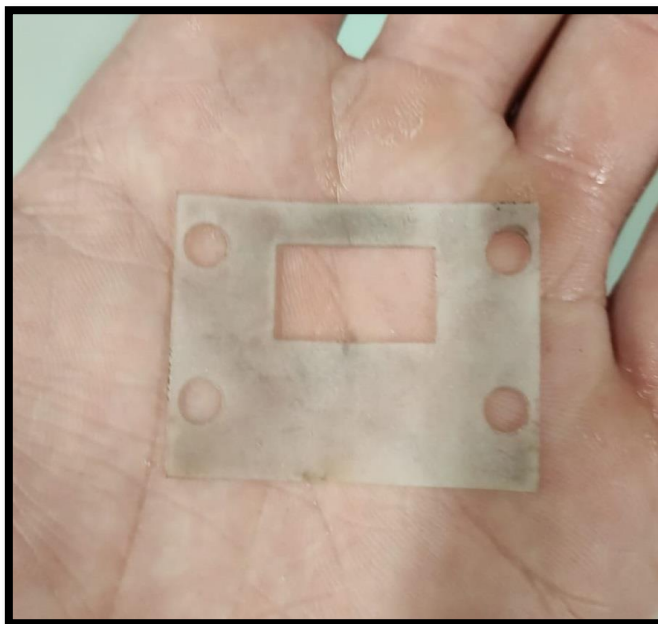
Silicone sheet cut with CO₂ laser used to seal both reactor compartments.
